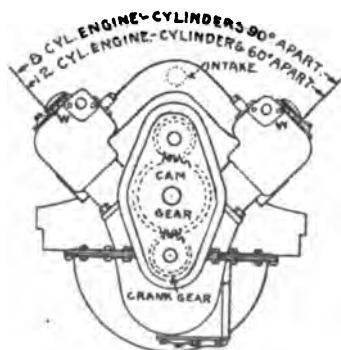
A "V" type eight cylinder engine. A regular 180 degree four cylinder type of crank shaft is used with two connecting rods on one crank pin.
